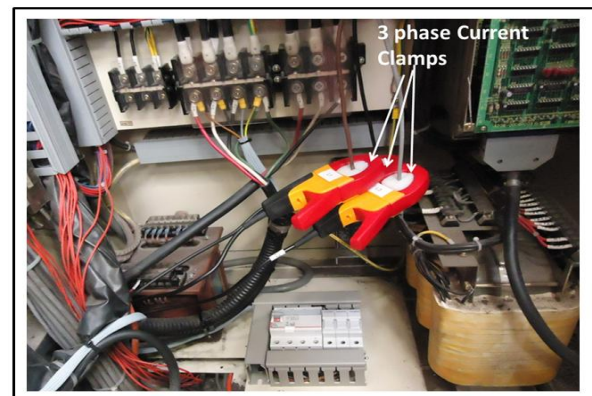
Fluke 434 power quality analyser clamped on three live wires at the back of the Takisawa Mac-V3 milling machine.
